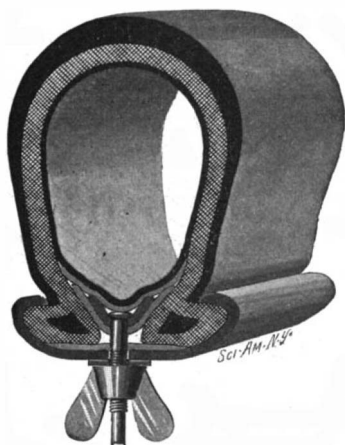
Double-Tube Clincher Tire with Locking Bolts.
